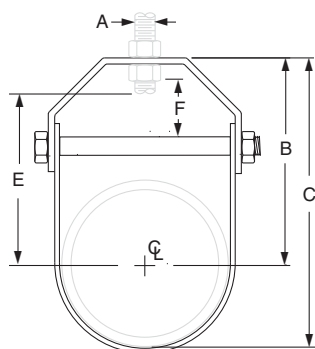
Loads (lbs) • Weight (lbs) • Dimensions (in)
